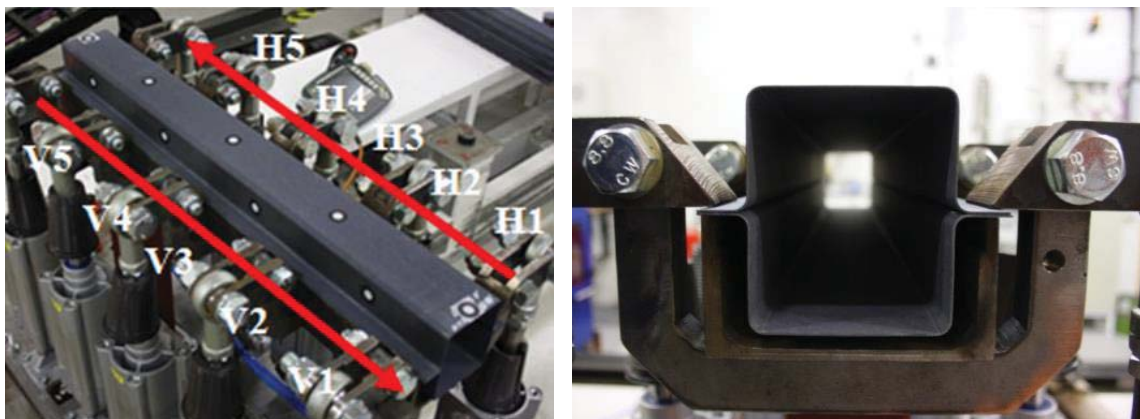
The fixture used during welding. The fixture holds the beam with 10 clamps, H1 – H5 and V1 – V5.
